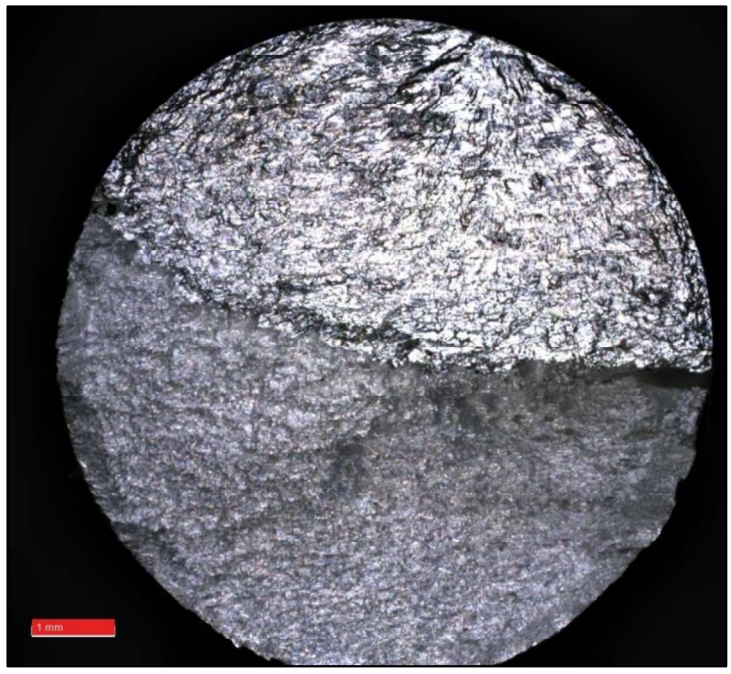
Digital microscope image of ASM-2 fracture surface
